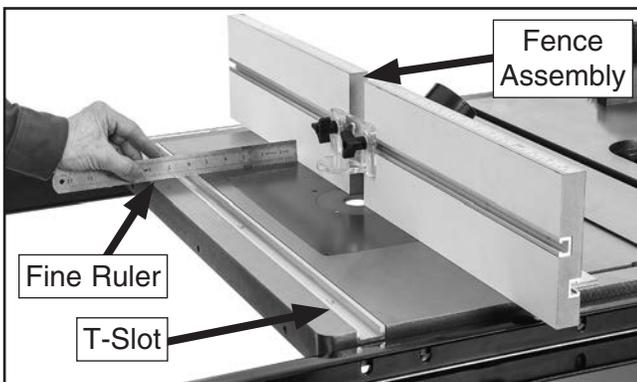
Measuring router mounting plate alignment with extension wing table.
